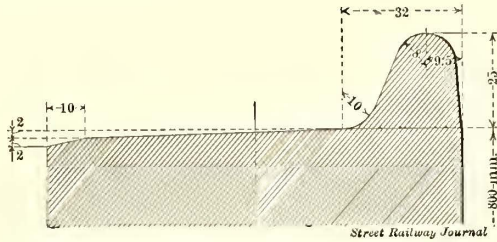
SECTION (HALF SIZE) OF WHEEL USED ON THE BUDA-PEST UNDERGROUND RAILWAY
